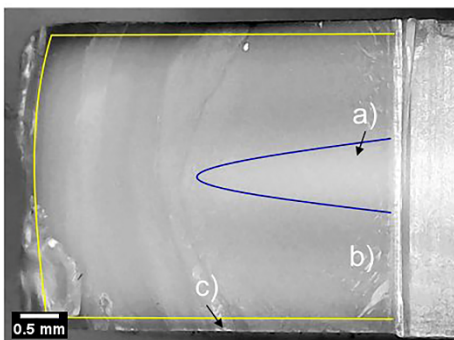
Optical microscopy view of the cryogenic fracture surface.
